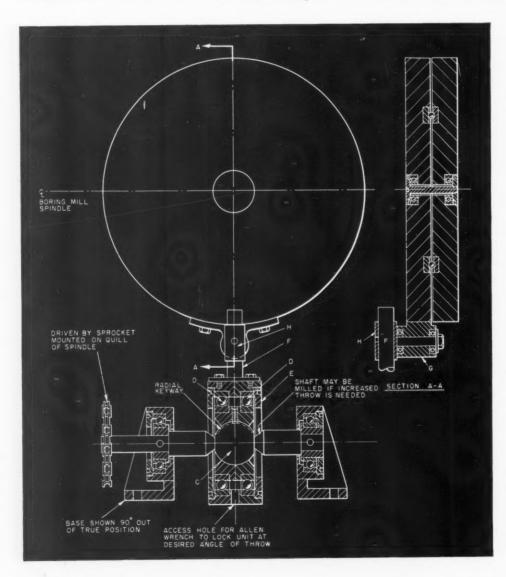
Diagram of an angular throw mechanism that oscillates a circular table on the boring mill shown in Fig. 2
